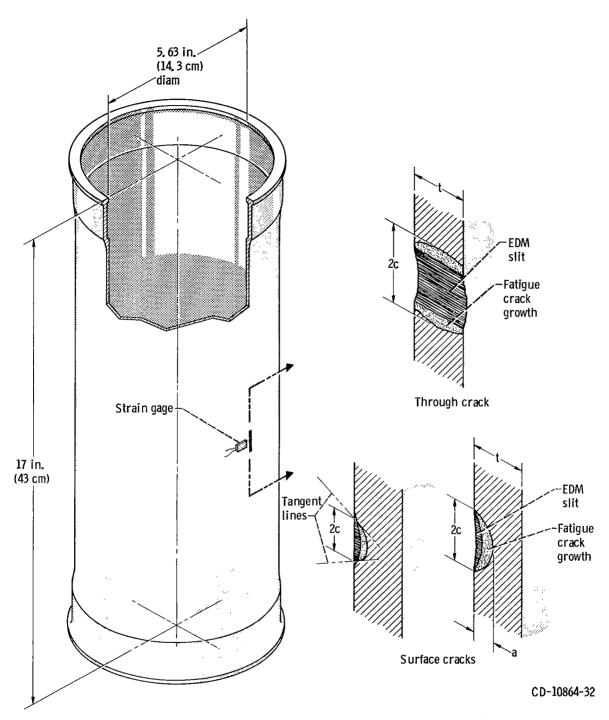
Typical cylindrical test specimen showing crack shape and location. Width of slit, 0.005 inch (0.013 cm). Note: 2c = 0.10 to 1.0 inch (0.25 to 2.5 cm); a = 0.024 to 0.060 inch (0.061 to 0.152 cm).
